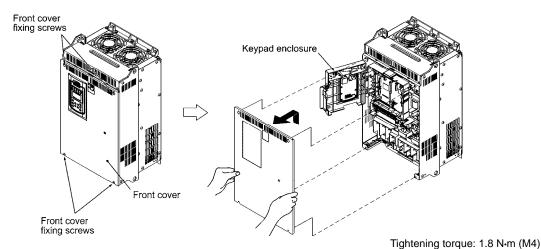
Removing the Front Cover (FRN30VG1□-2□)
